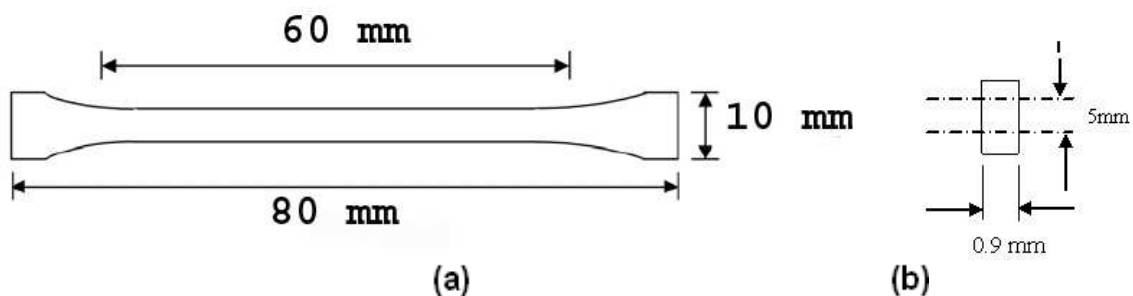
(a): Final dimensions of a dog bone specimen (a) front view (b) side view [132]
